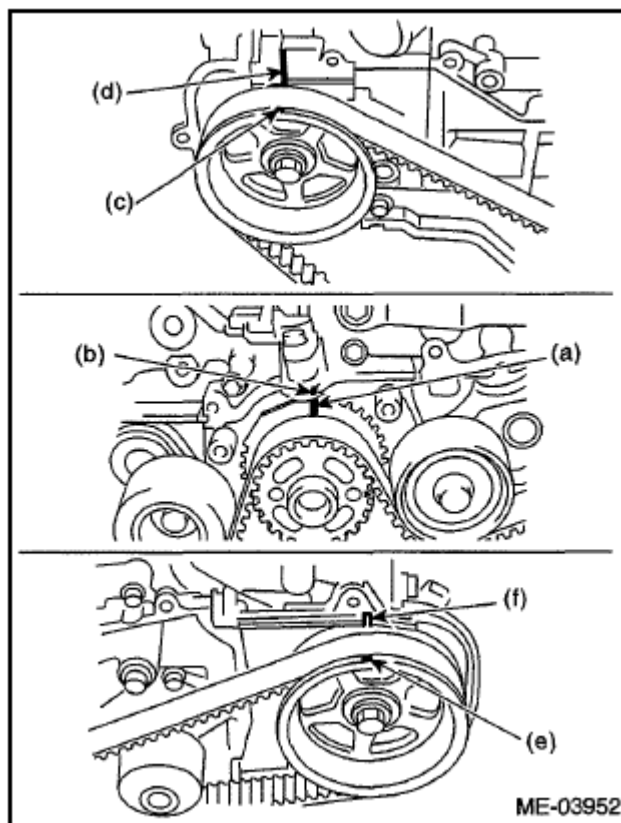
Aligning Mark Of Sprocket To Mark Of Oil Pump
